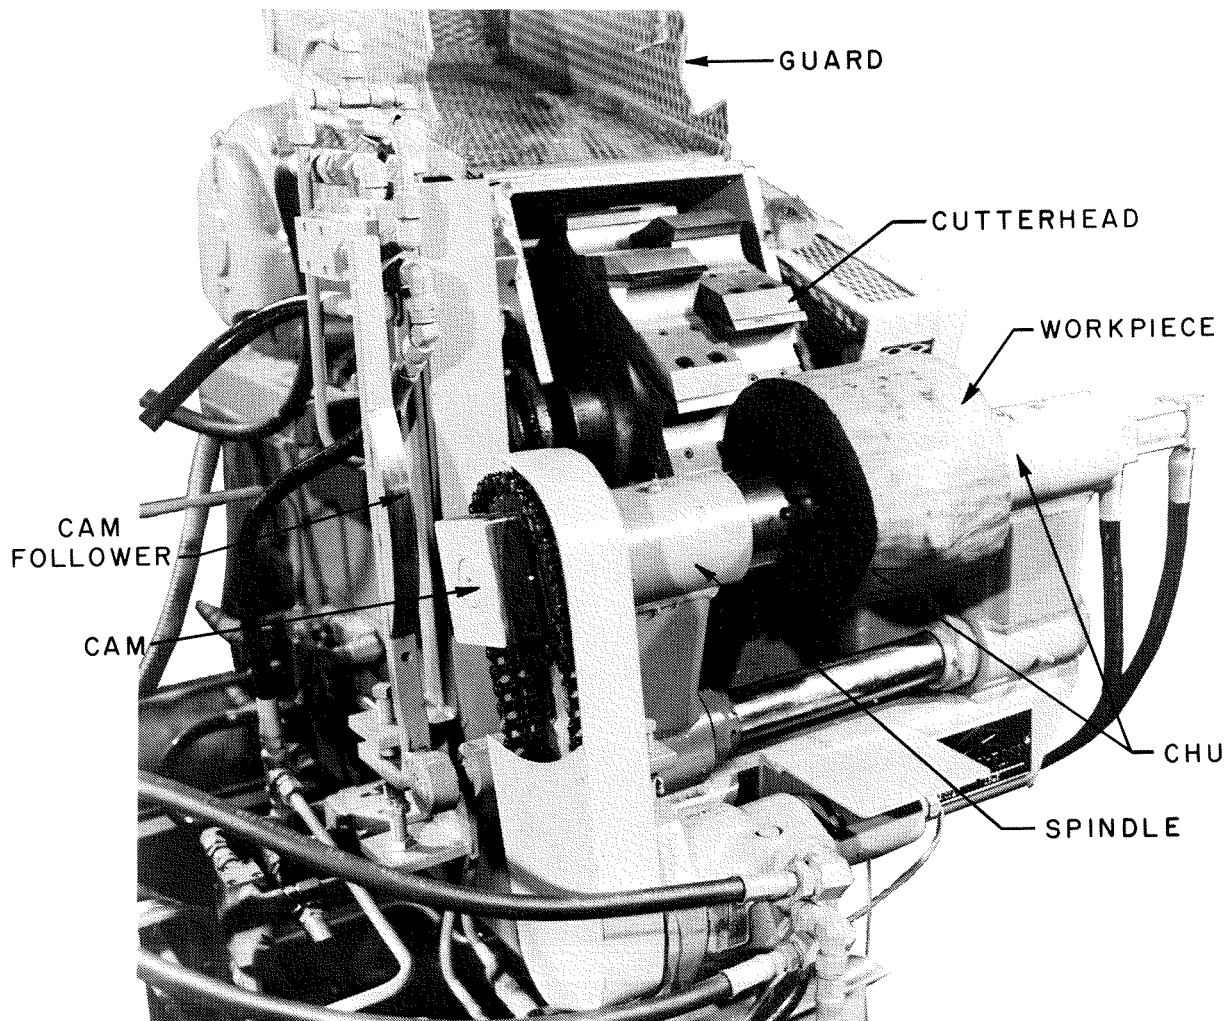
Second prototype of Koch shaping-lathe headrig, with 10-knife flaking cutter in place. Cam is 4 inches square. The bolt, when machined, will also measure 4 inches square.
